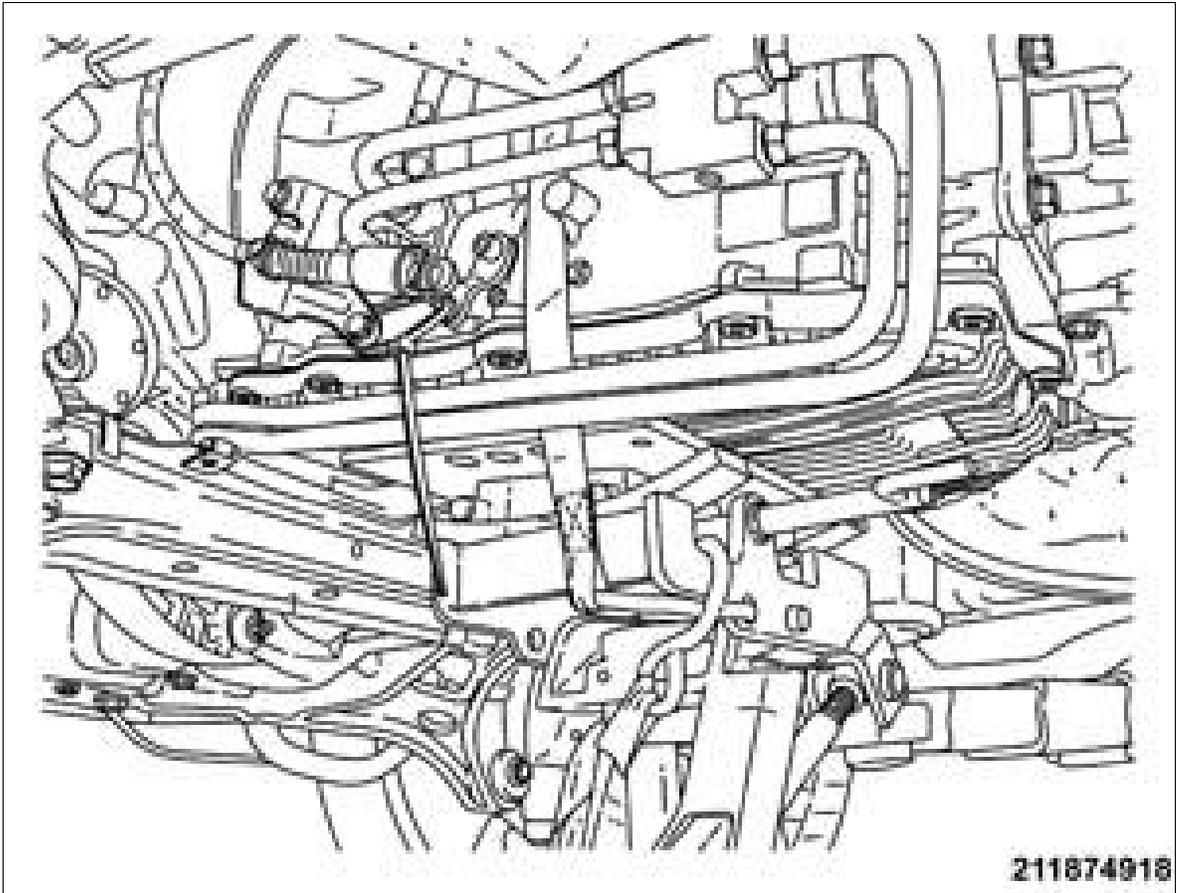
Mechanical Park Release Cable, Lever & Zip Tie
